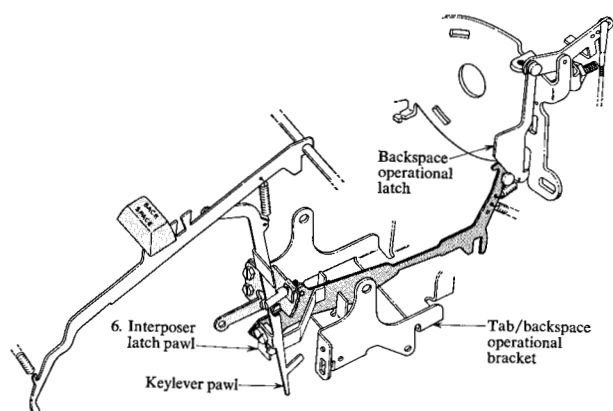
Input, activation mechanism and part of drive mechanism as oriented in machine (front of machine to left).
